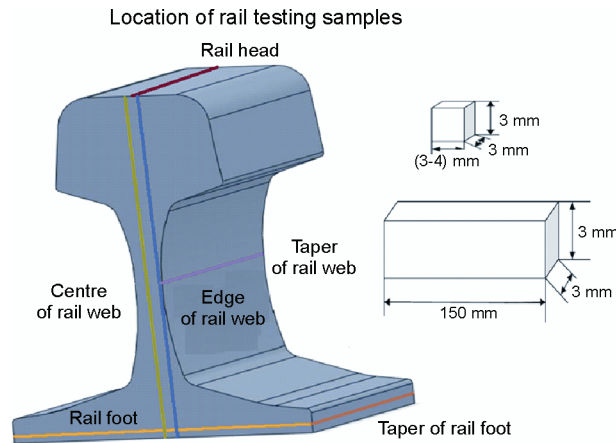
60E1 sample removal locations and their geometric dimensions
